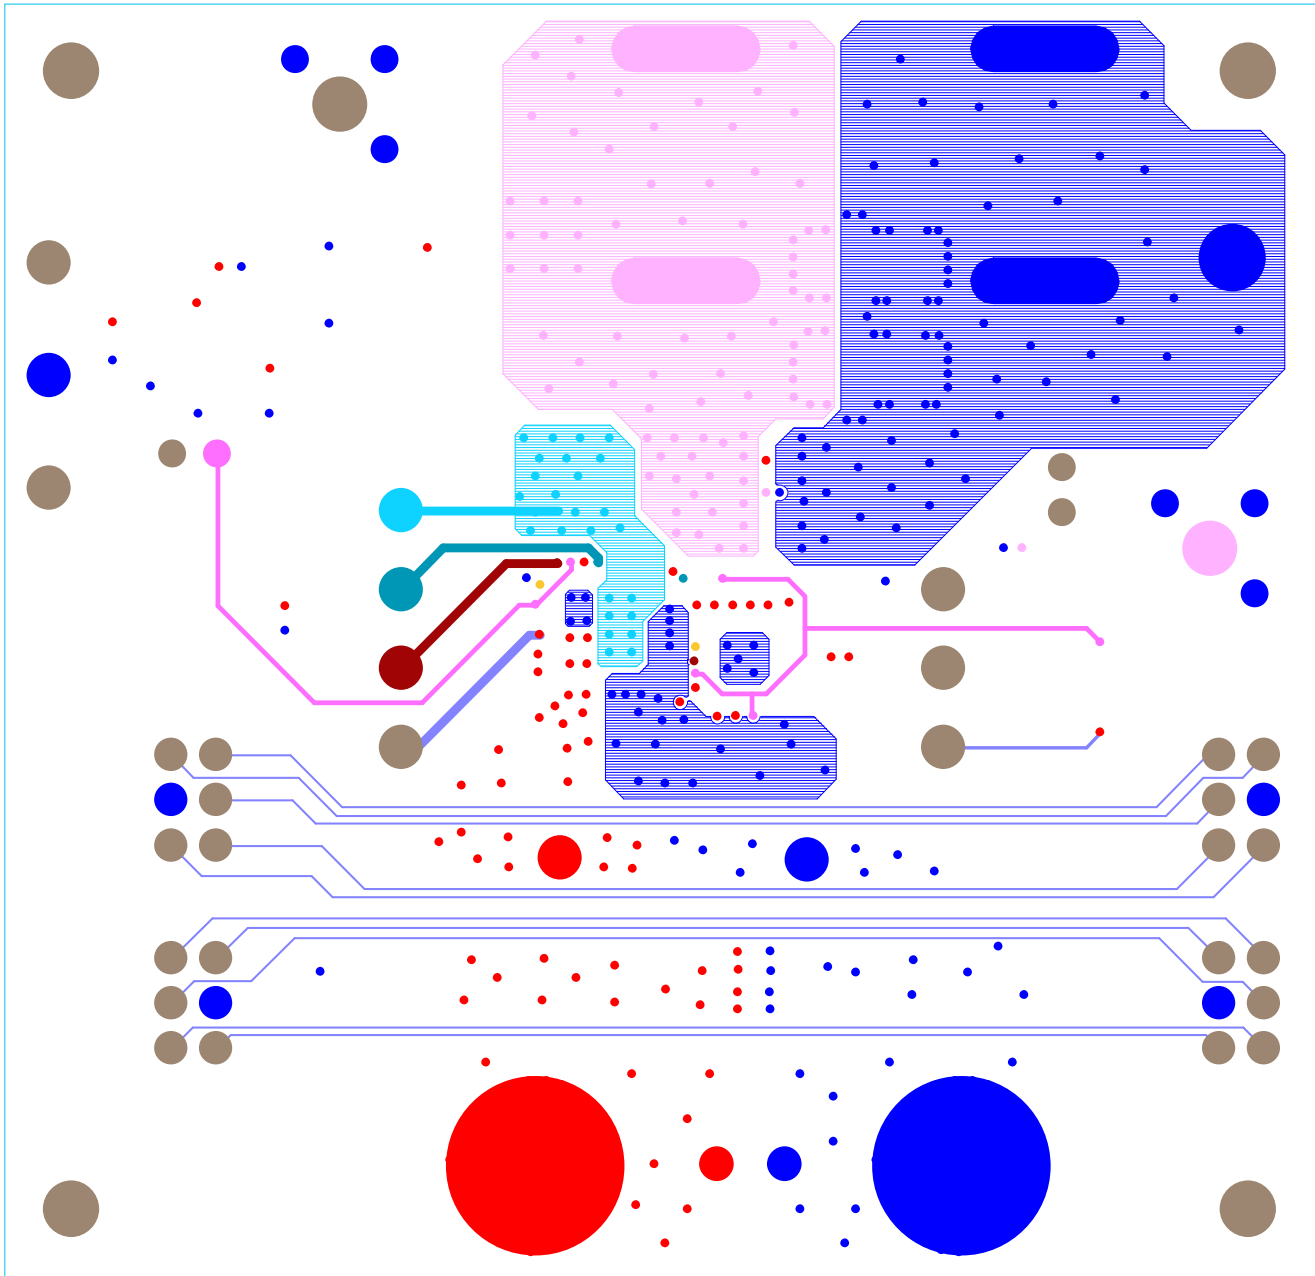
PCB - INNER LAYER 3 (TOP VIEW)
